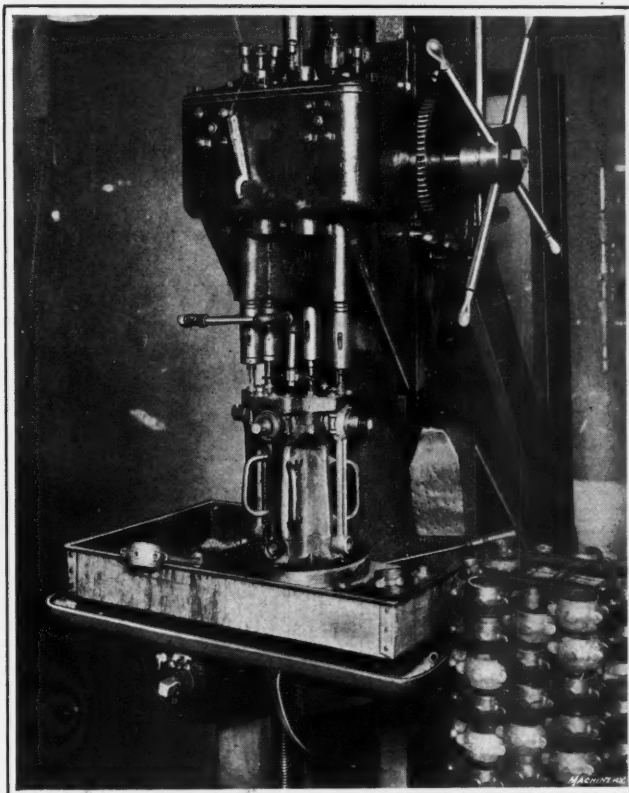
Special Foote-Burt Drilling Machine built for drilling Bolt Holes and an Oil-hole in Willys-Overland Connecting-rods
